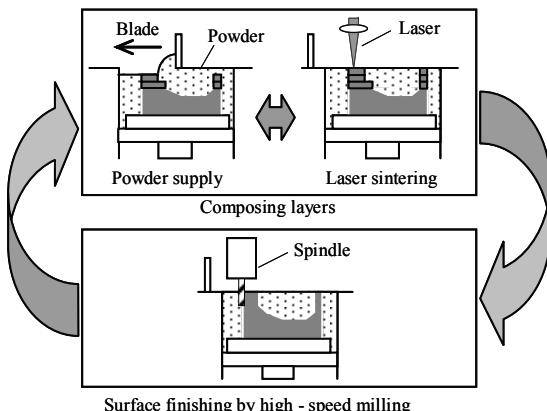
Process image of Milling - Combined Laser Metal Sintering
